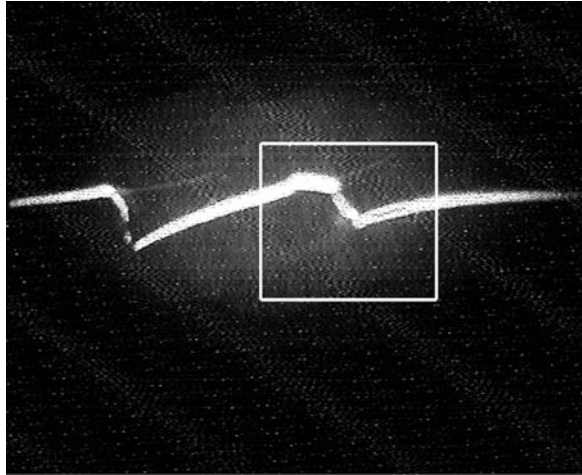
Overlapped weld seams of spiral board heat exchanger
